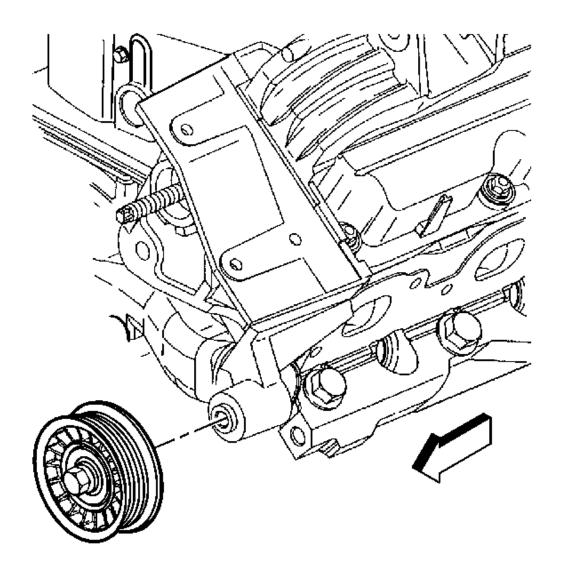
Drive Belt Idler Pulley & Bolt Courtesy of GENERAL MOTORS CORP.
